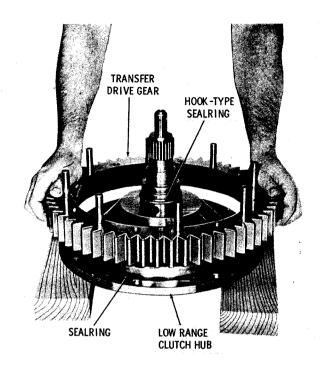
Installing transfer drive gear onto low-range clutch hub
